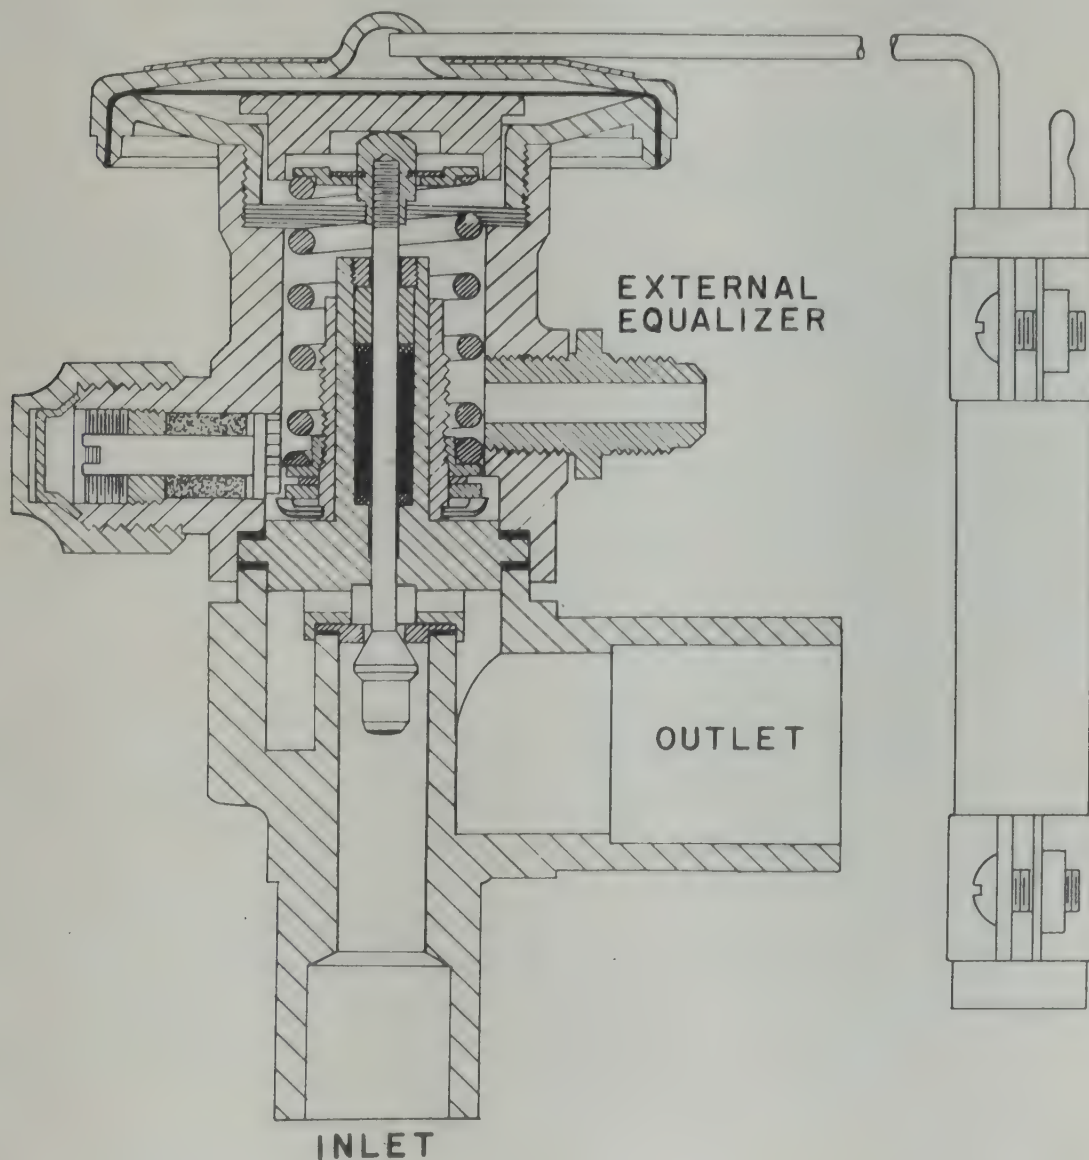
Cross-sectional view of a single-outlet thermo-expansion valve for Freon 12. (Photo courtesy of Alco Valve Company)
